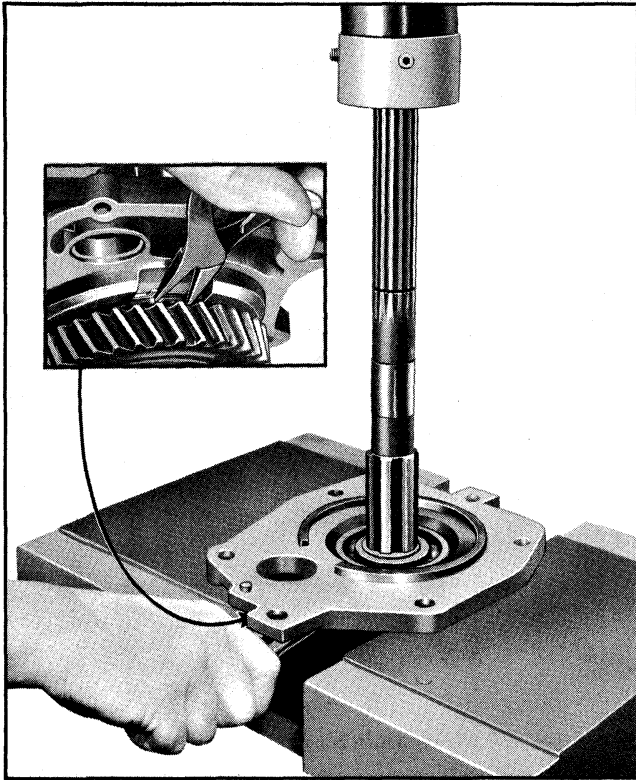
A-21 Removal of Mainshaft from Rear Bearing Retainer
